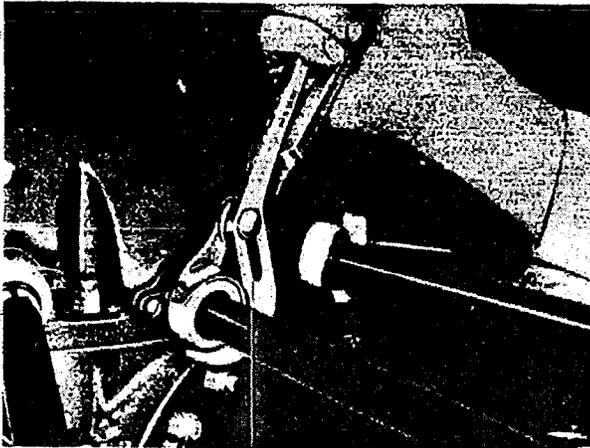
Loosening Push Rod Cover Tube Packing Nut
